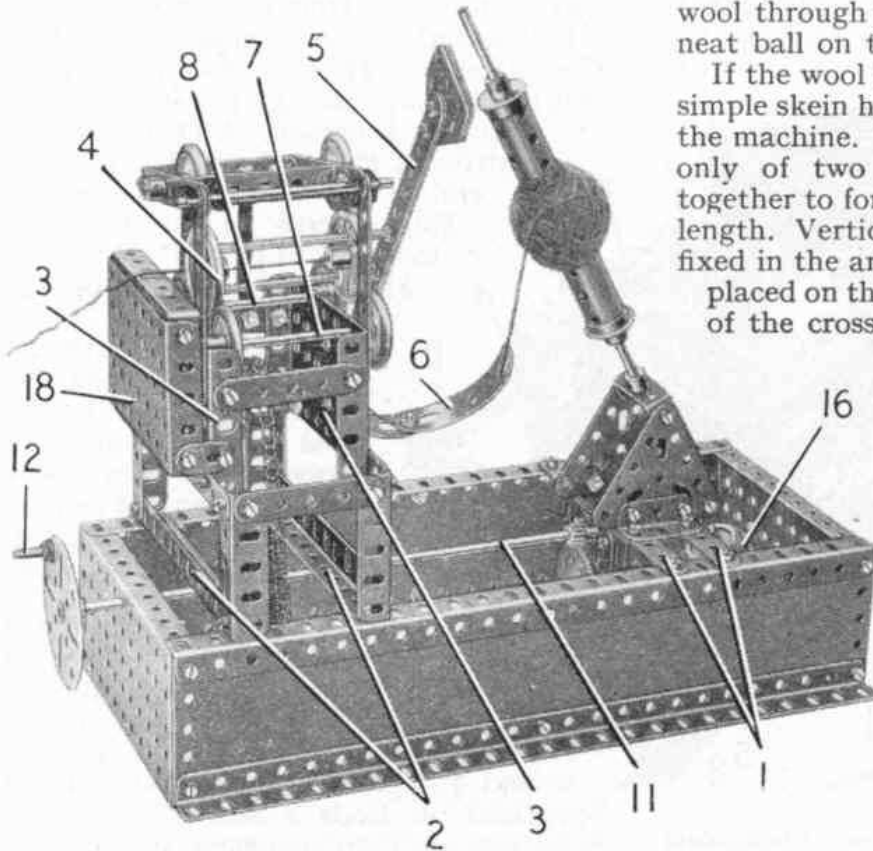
This view shows the operating handle and the chain drive arrangement that rotates the winding arm.
